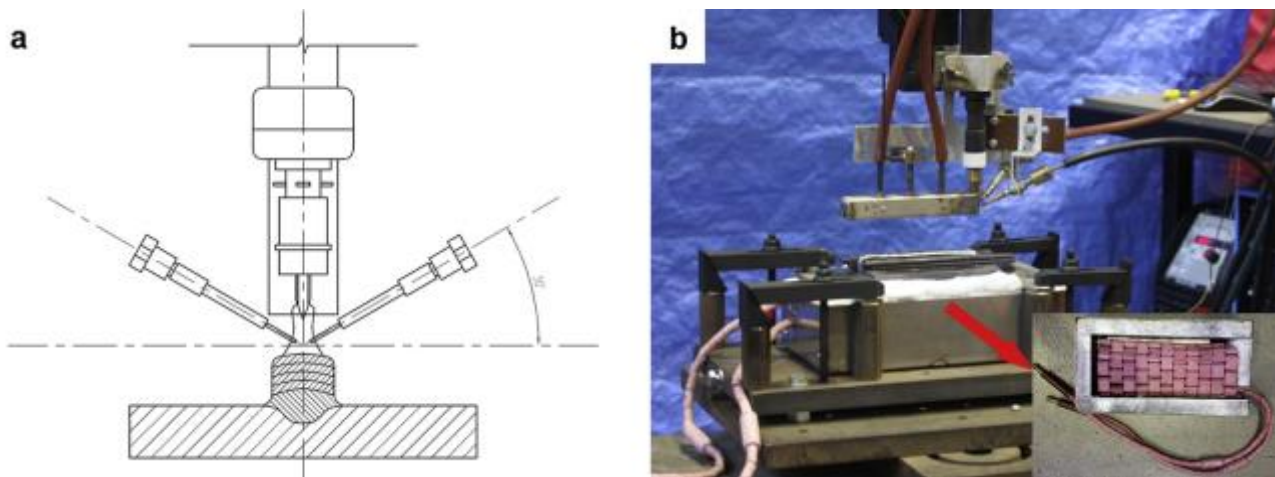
4 Experimental equipment: (a) schematic drawing; (b) physical photo [16].
